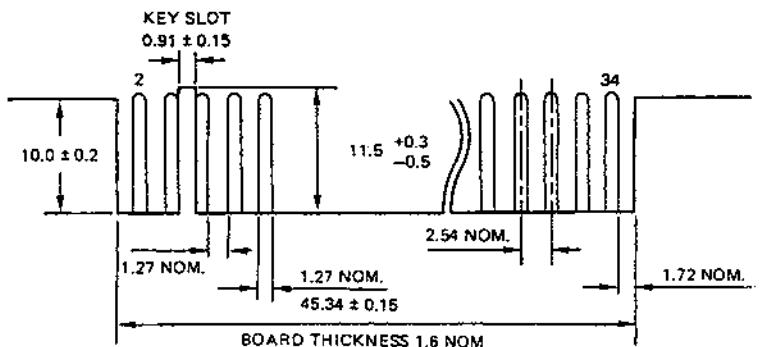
Connector J1 Dimensions (mm) and Pin Numbers
